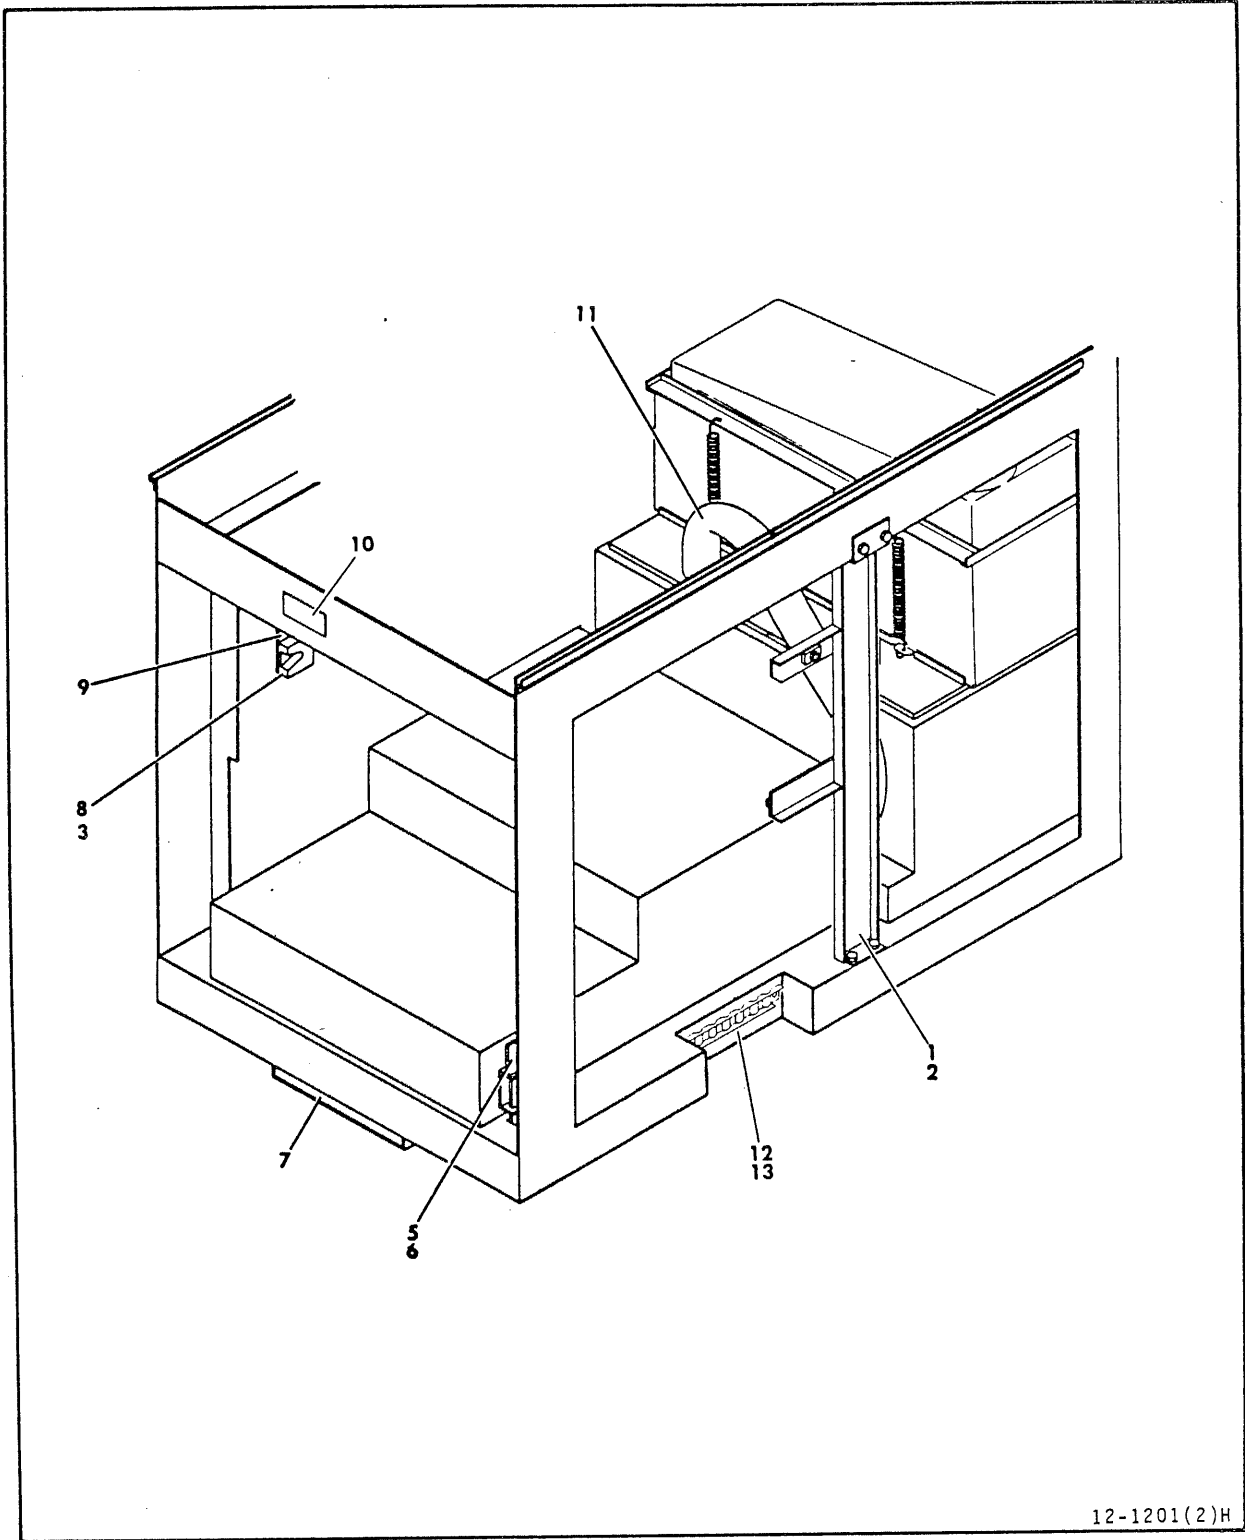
A-11. Frame Assembly Rear (Non-VDE)
